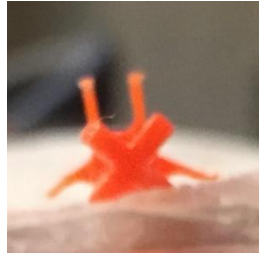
Housing Assembly Barrell Back Panel (Side View)
